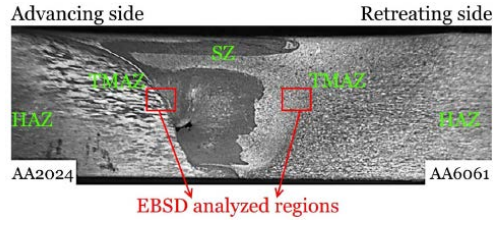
Macroscopic photograph of the dissimilar friction stir welded joint.
